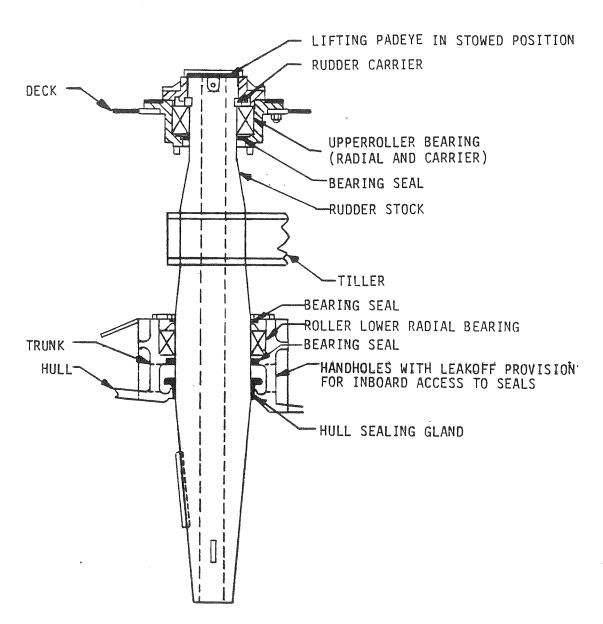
RUDDER STOCK BEARING TYPICAL ARRANGEMENT "E"
